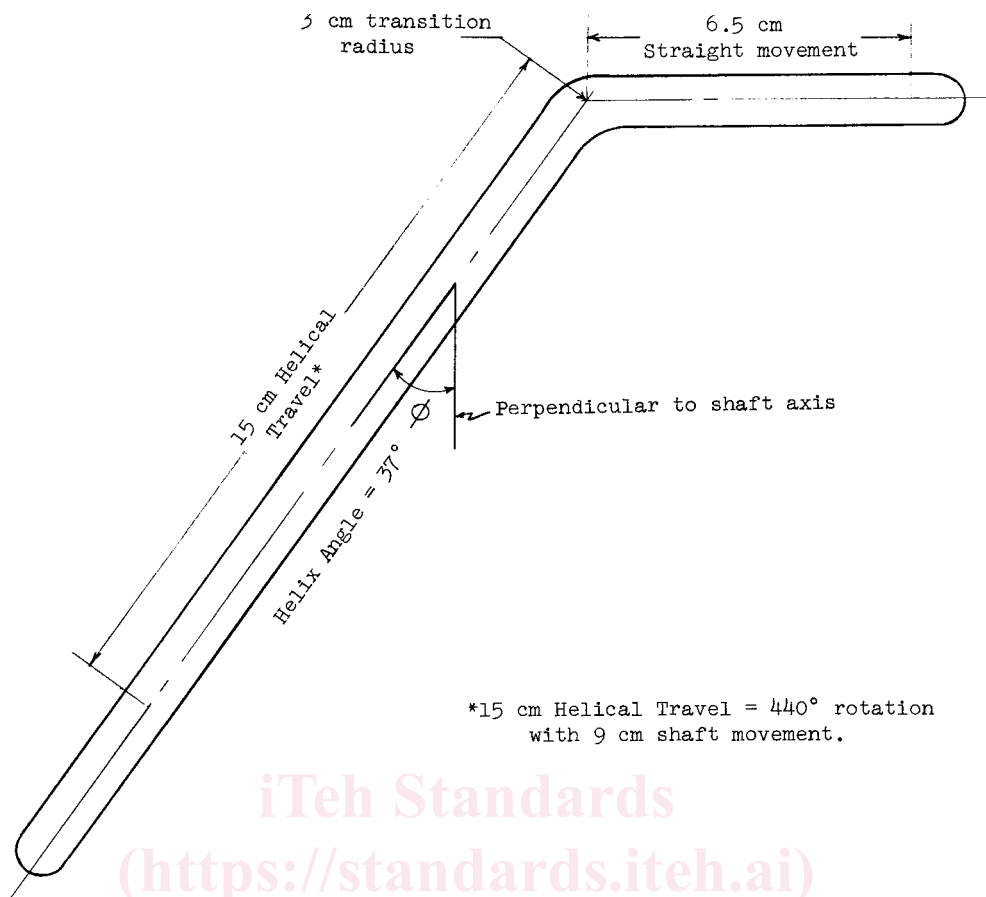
Planar Evolution of Gelbo Shaft Helical Groove (31.8-mm (1.25-in.) Diameter Shaft)
